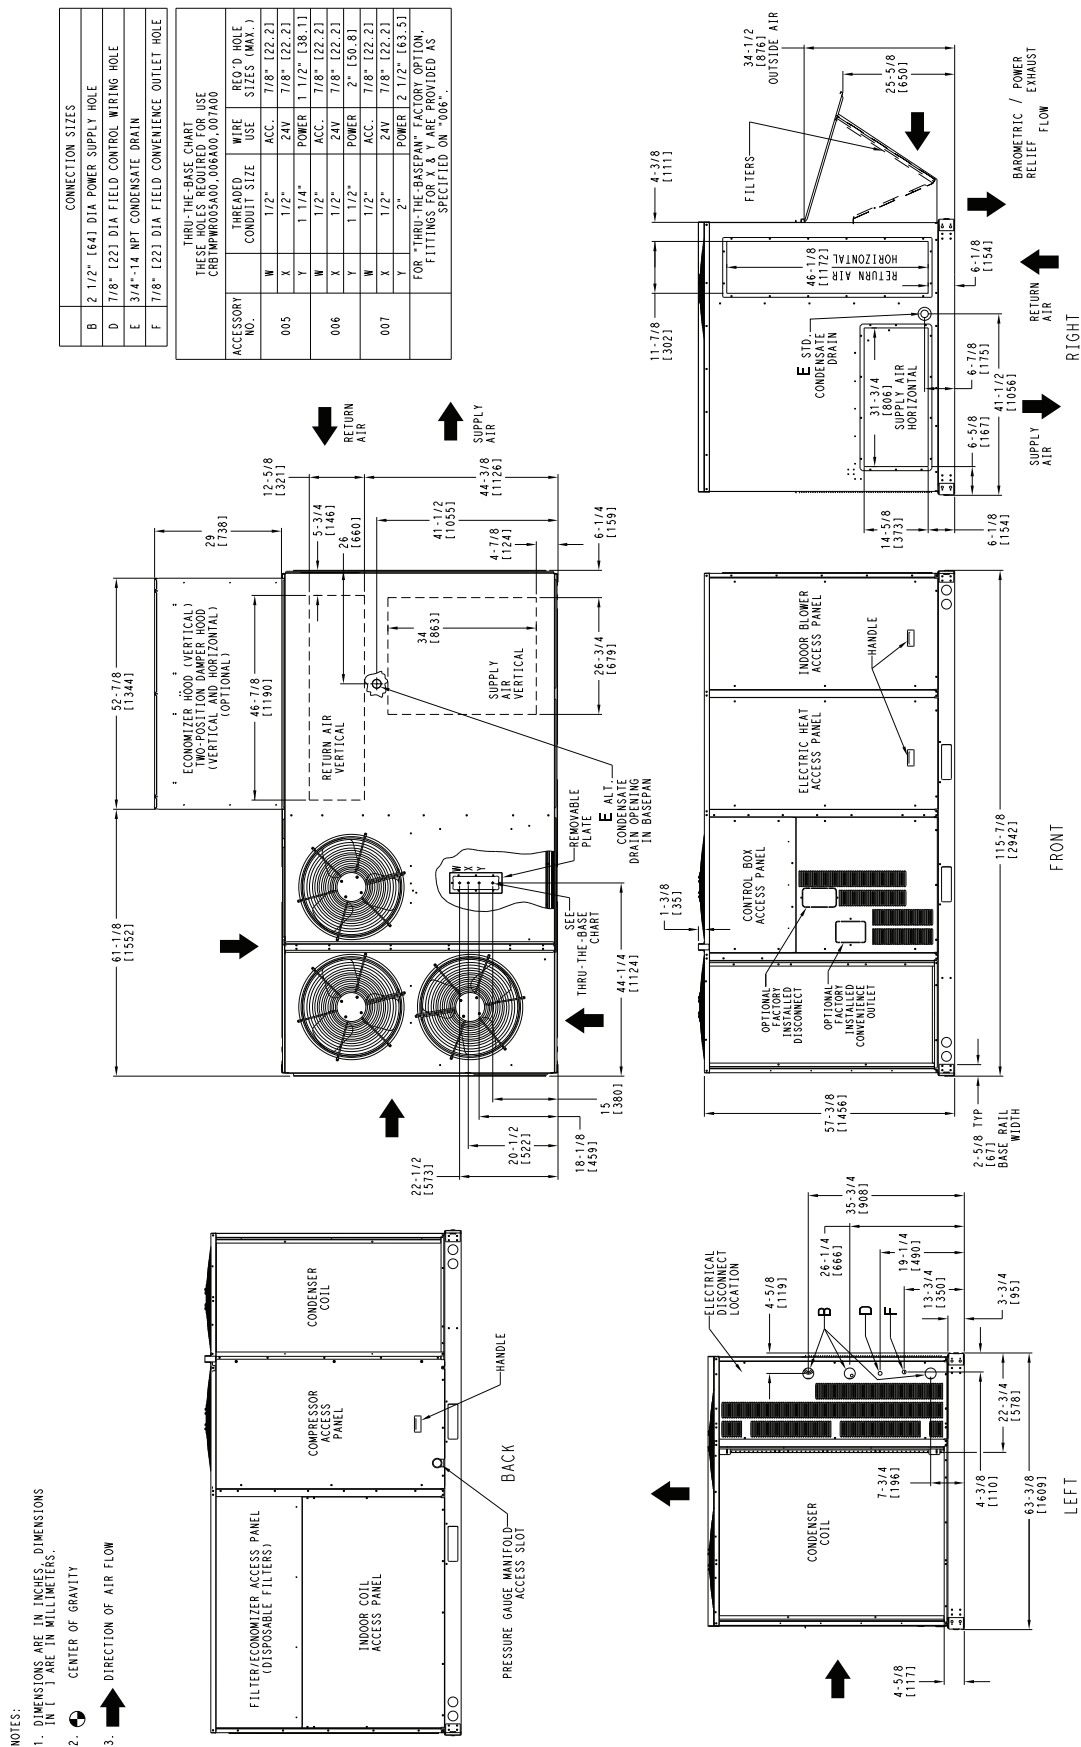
Dimensions RAS180 (Sheet 1 of 2)
